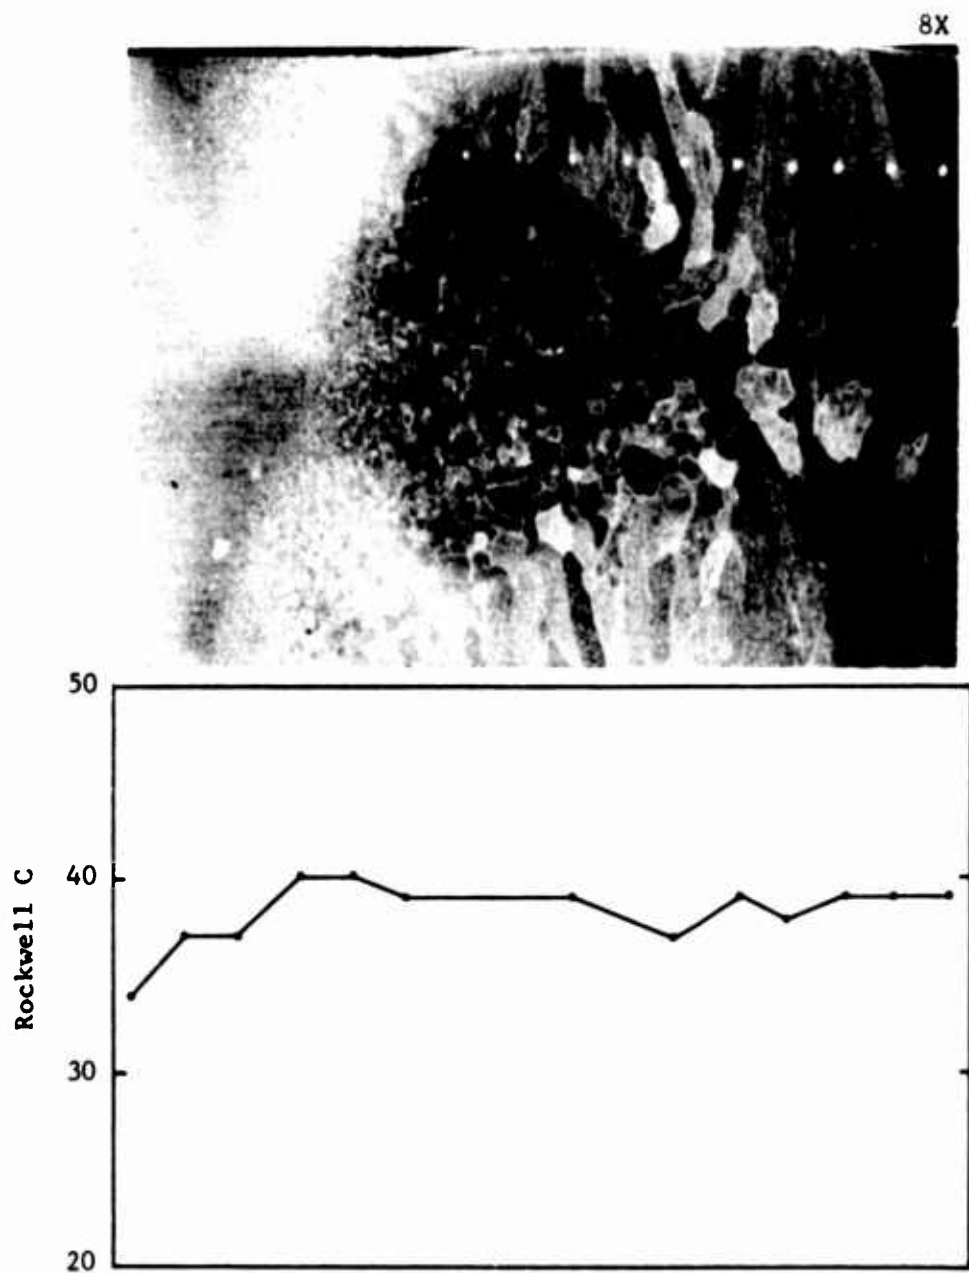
MACROSTRUCTURE AND HARDNESS MEASUREMENTS IN AN AUTOMATIC GTA WELD USING Ti-6Al-6V-2Sn FILLER METAL
